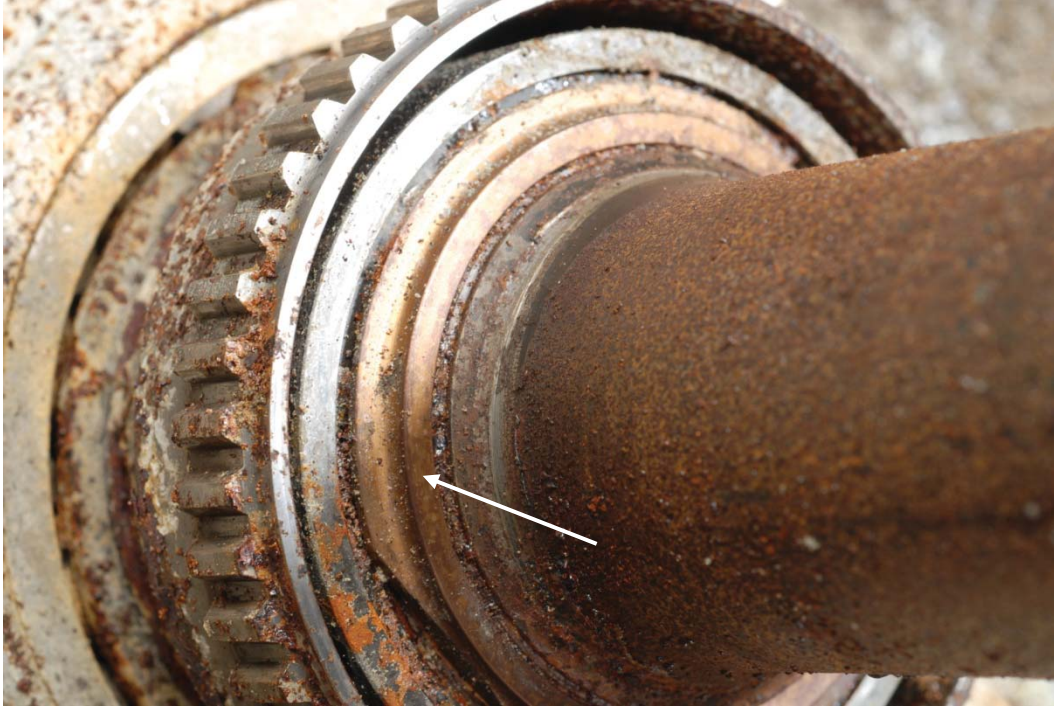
P-79001C, Propeller Shaft, Rotational Scoring
